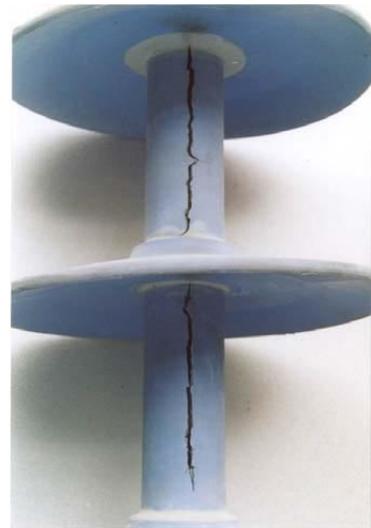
Example of defective (improperly glued to core) housing after 4 kV/ns steep-front impulse test.
